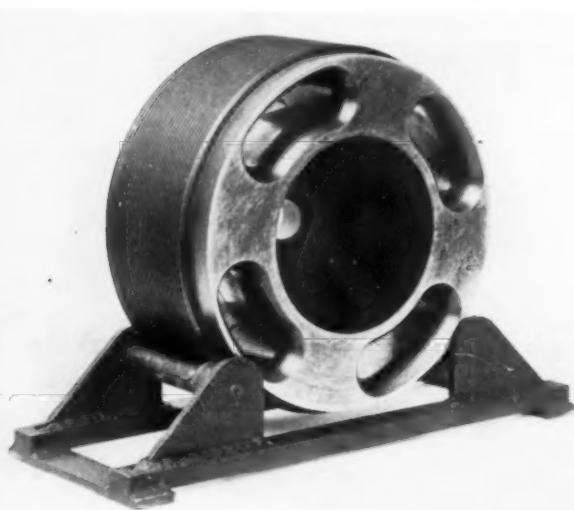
Holding fixture with rollers allows easy positioning of round workpiece for hand operations.
